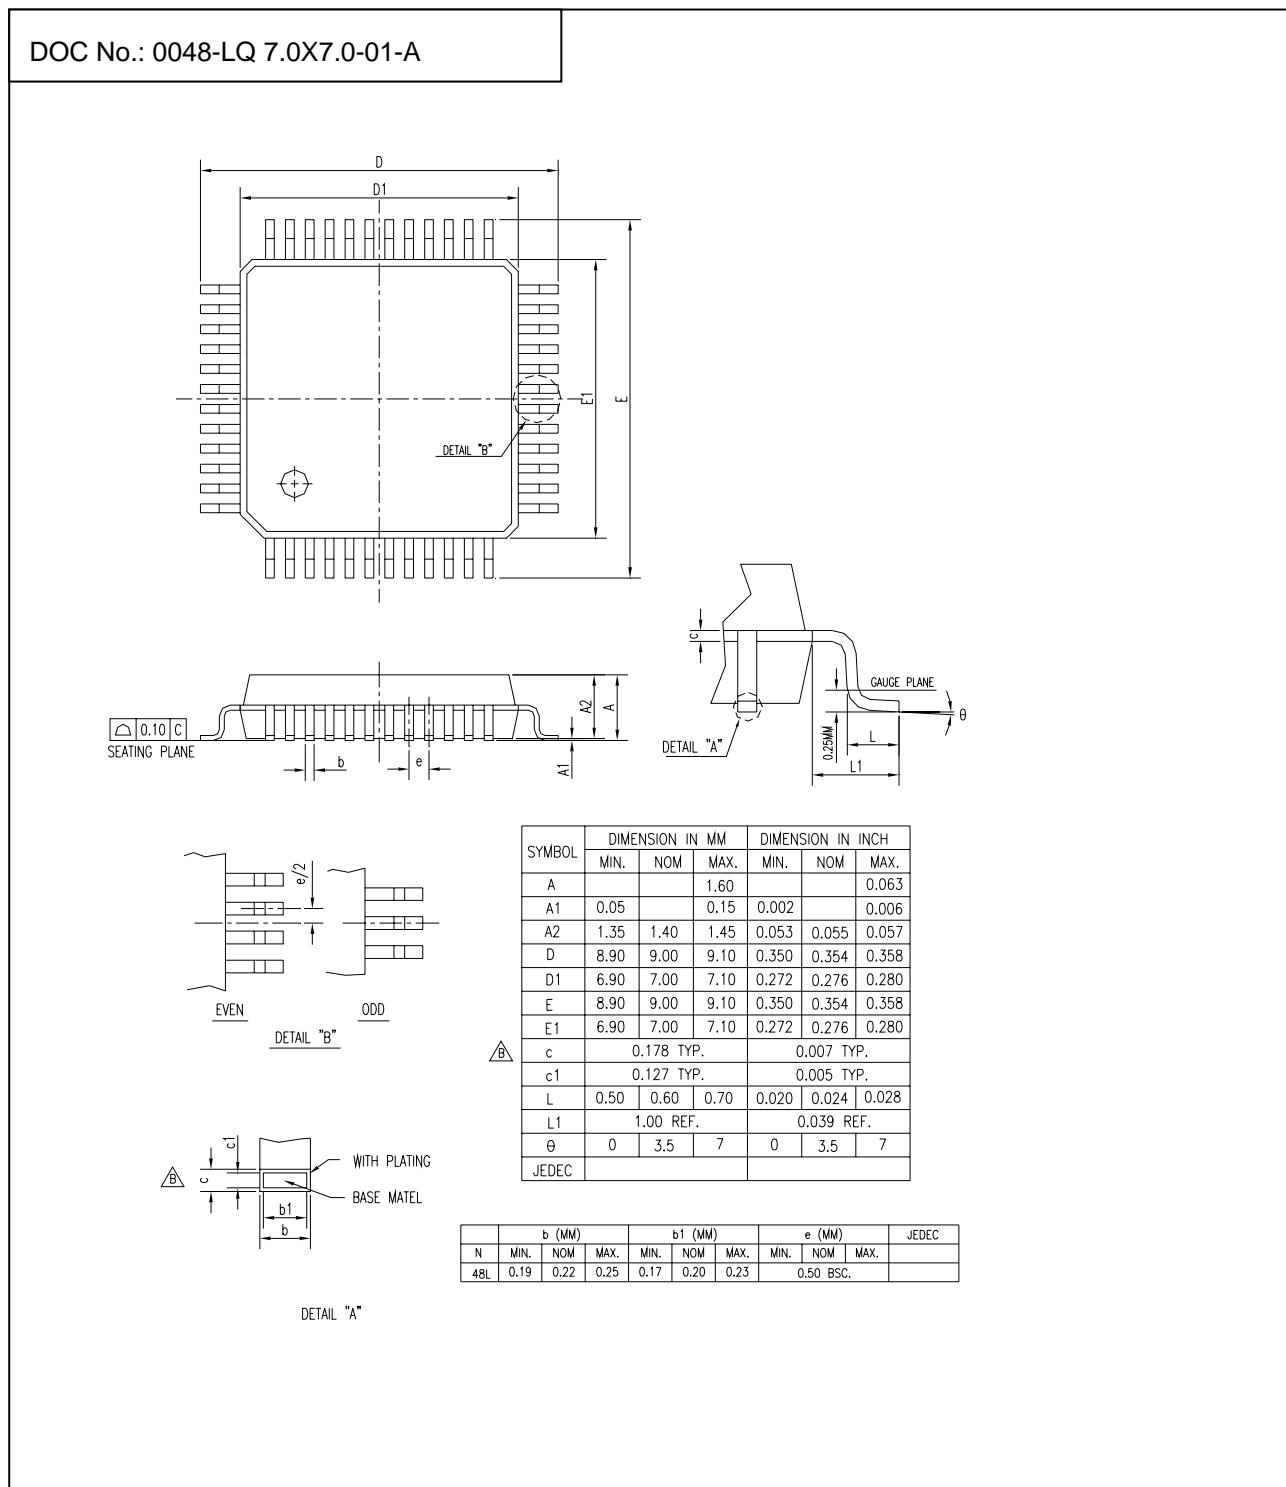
48 Pin LQFP 7.0x7.0x1.4 mm Package Outline Dimension
